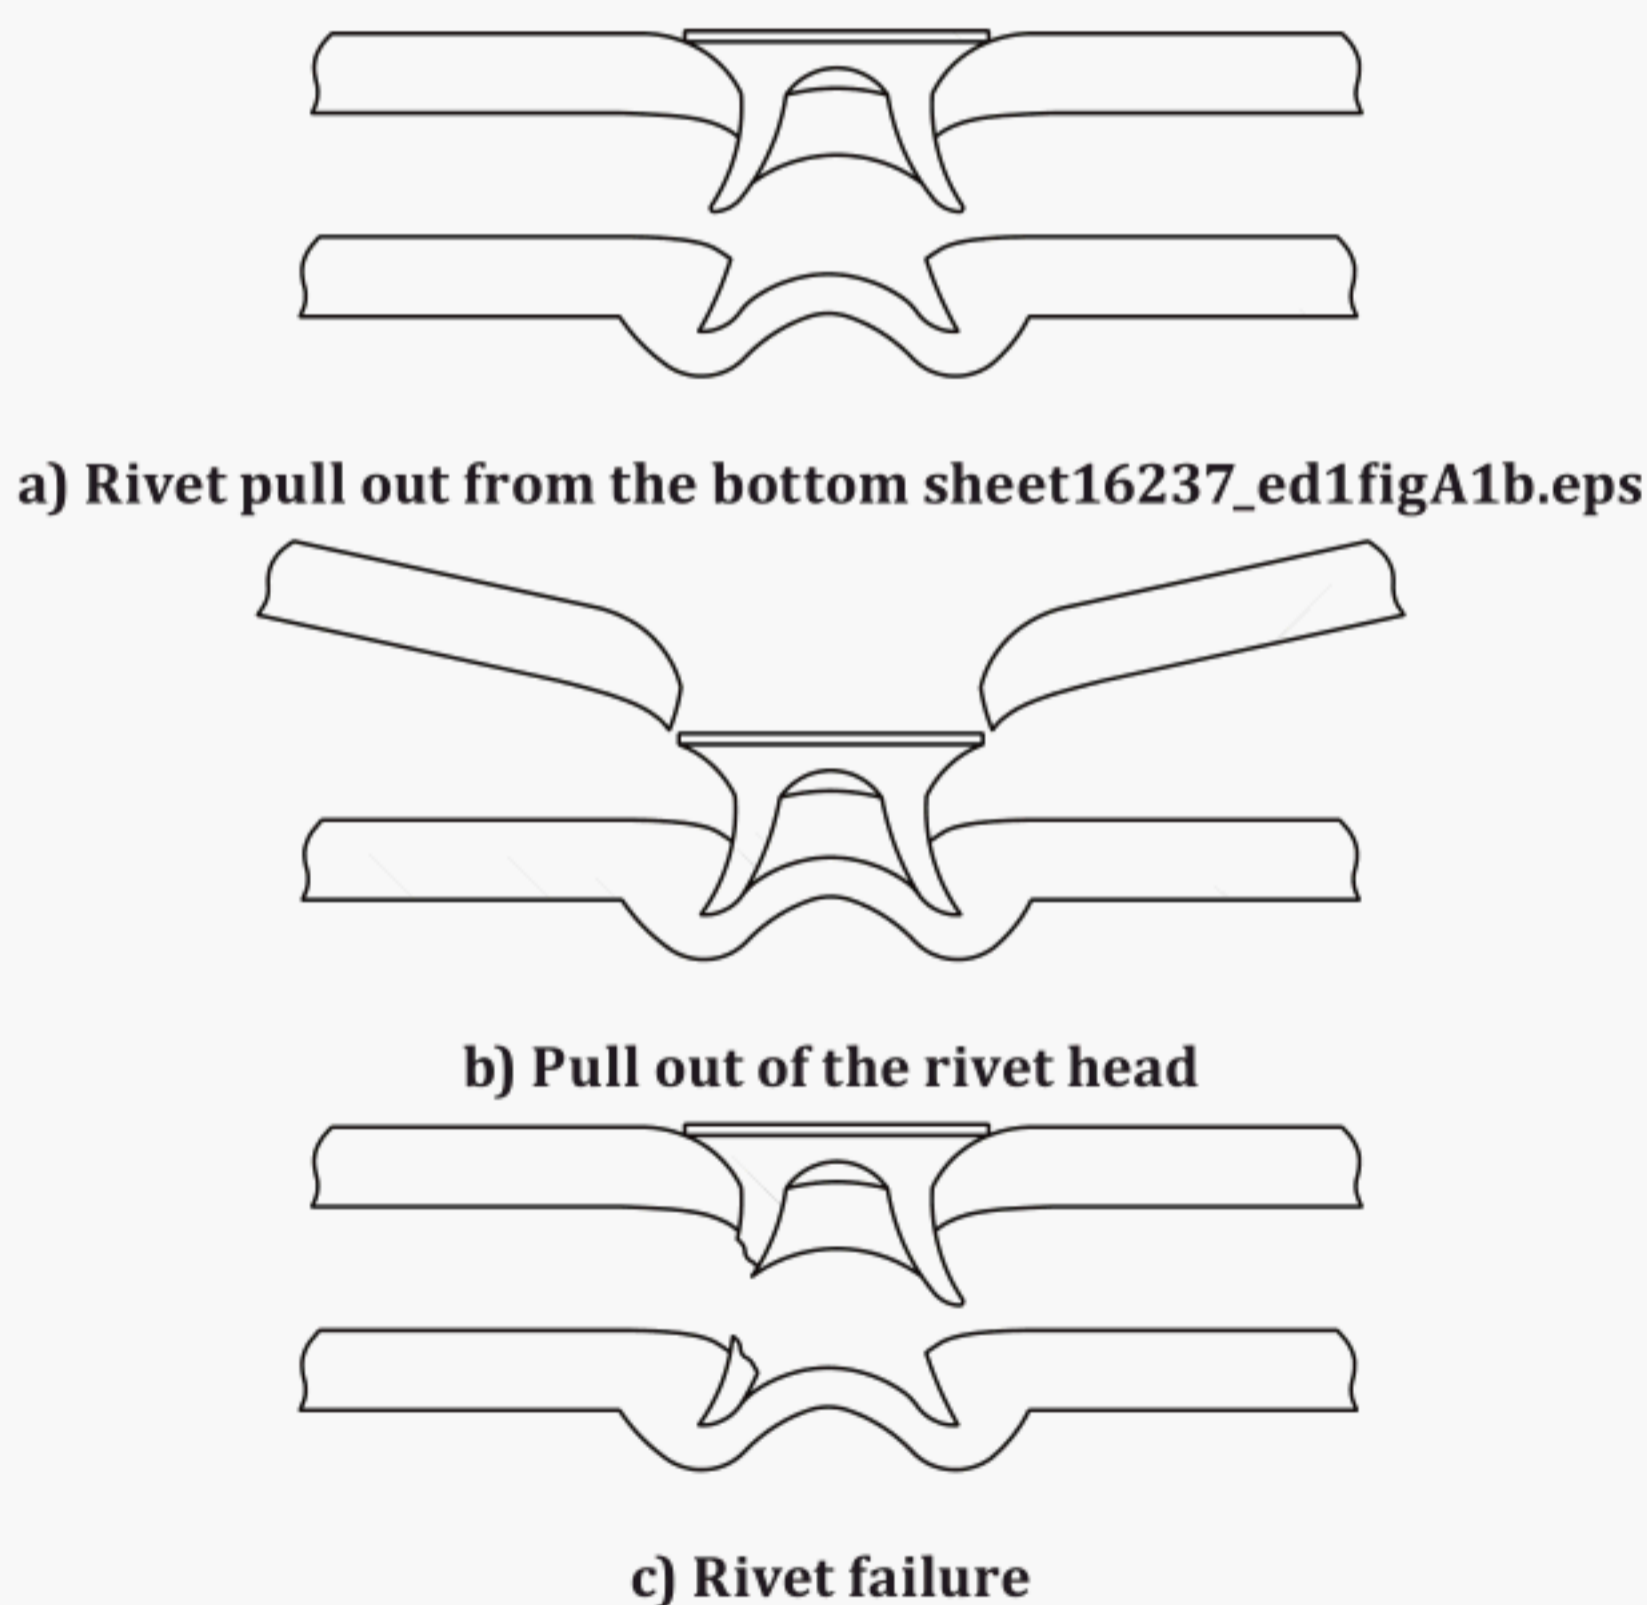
Typical failure modes of semi-tubular self-piercing rivet joints under cross-tension load
